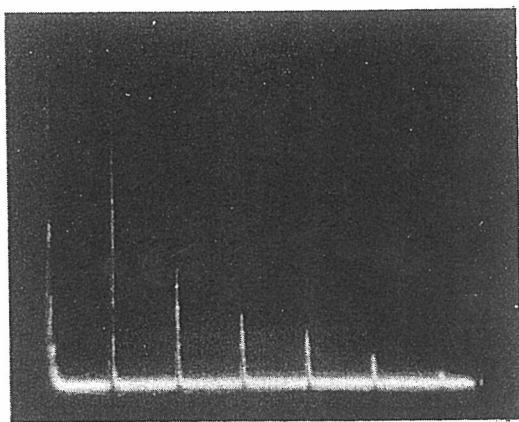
Echo observed by ultrasonic test at heavy section in casting.
